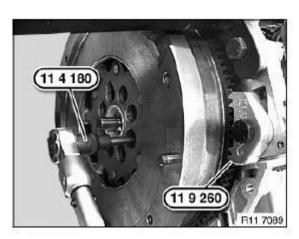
Identifying Special Tool (11 9 260 & 11 4 180) Courtesy of BMW OF NORTH AMERICA, INC.
